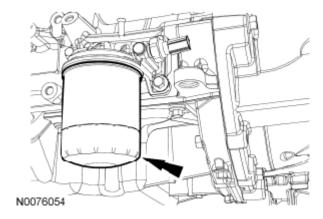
Locating Engine Oil Filter Courtesy of FORD MOTOR CO.
